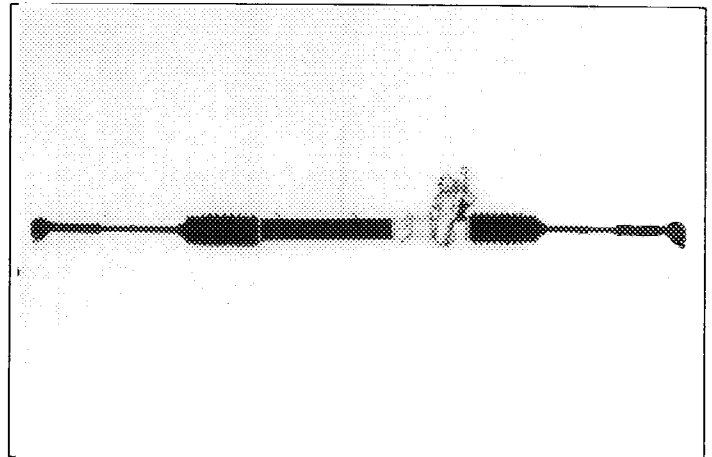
Heavy duty steering gear and side rods TYPE C
